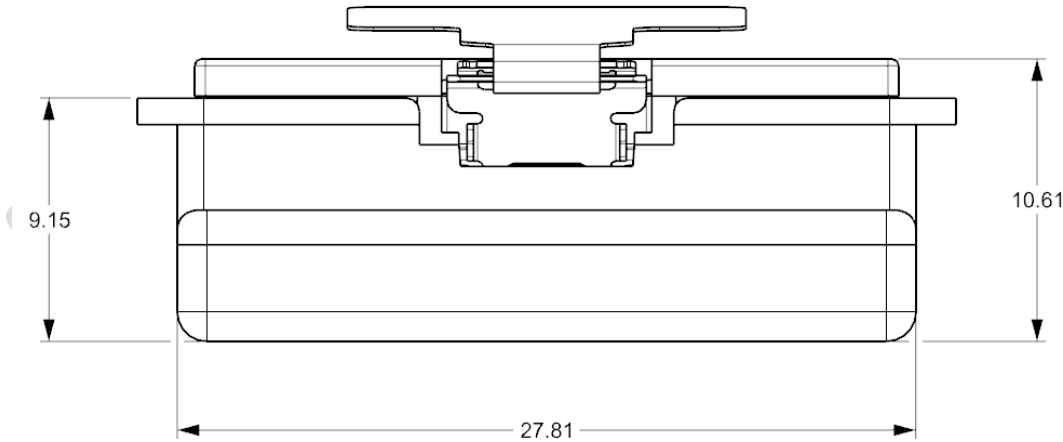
Top View of Free-Side Connector with Dust Cover Attached
